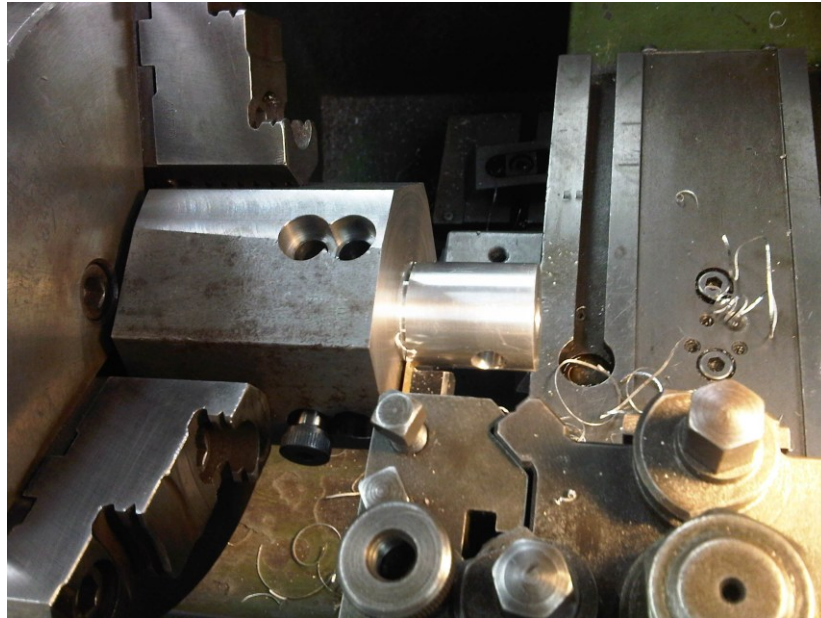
Picture of angled groove jig while cutting the second face of the angled groove.
